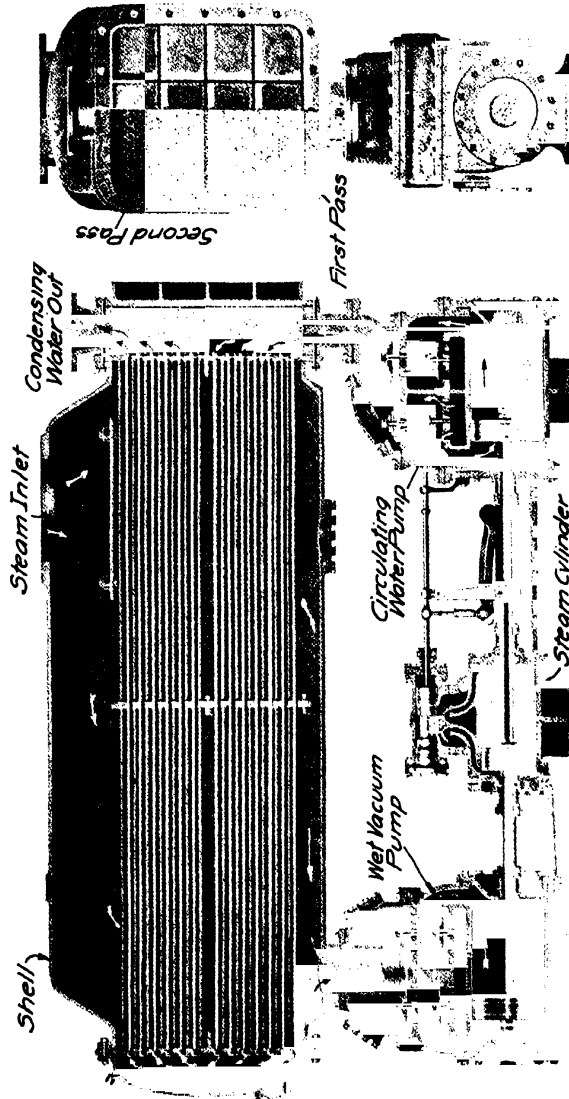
Wheeler Admiralty Surface Condenser Mounted over Combined Air and Circulating Pumps.
